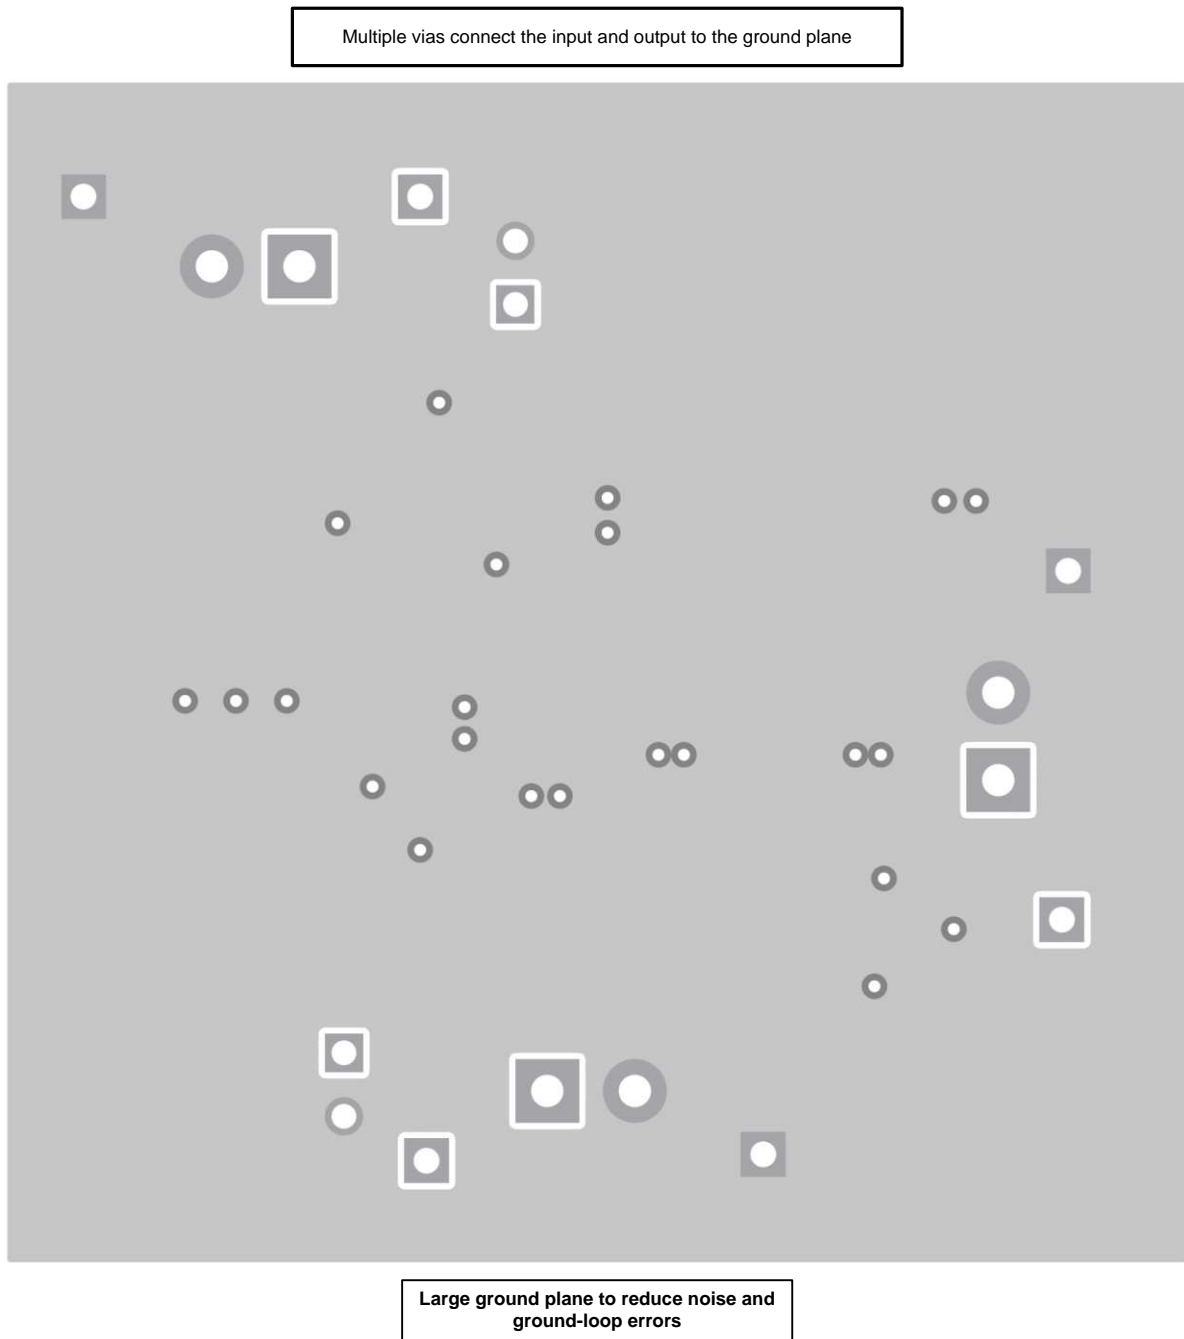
MC33063A-Q1 Layout Bottom Layer Example
